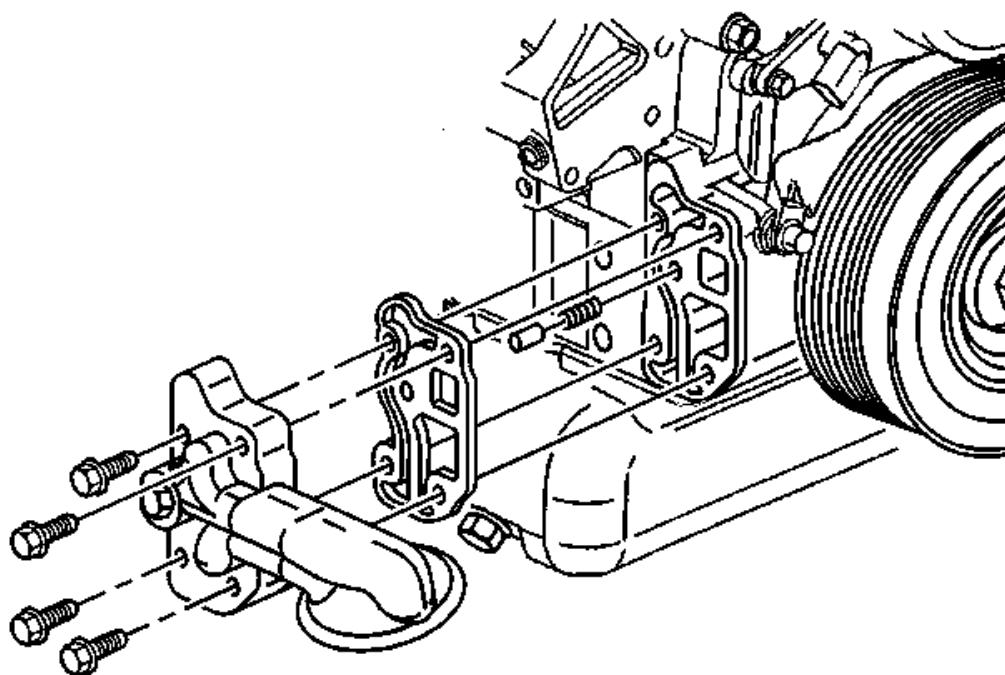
Removing/Installing Oil Filter Adapter & Pressure Relief Valve
